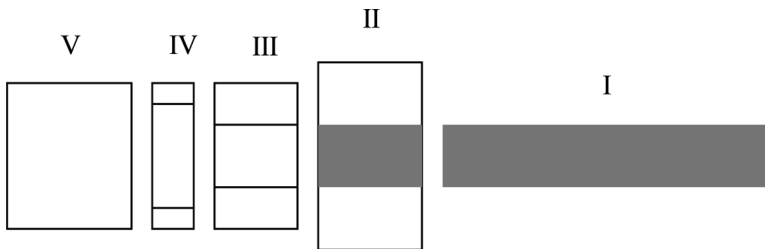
Five-section tool-holder model for 25.4 mm diameter carbide blank inserted in collet holder.
